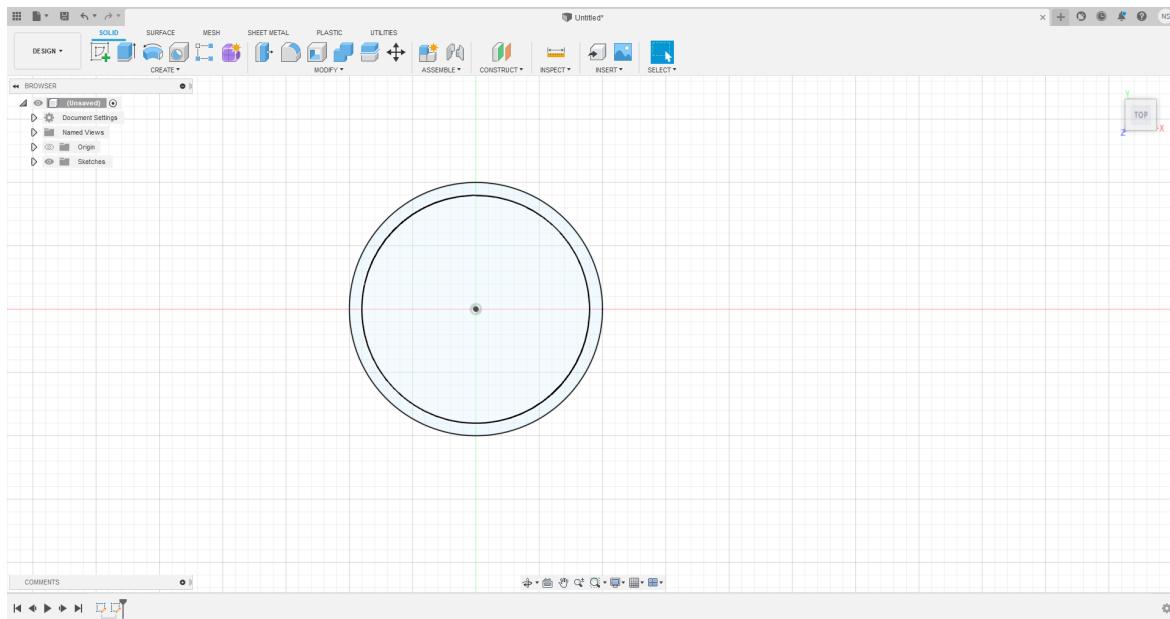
Fusion360 view after Finishing(Measurements Disappear)
